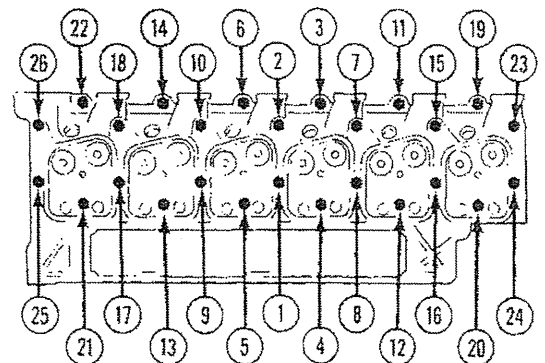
Cylinder Head Bolt Removal Sequence—Cylinder Head HotINSTALLATION
